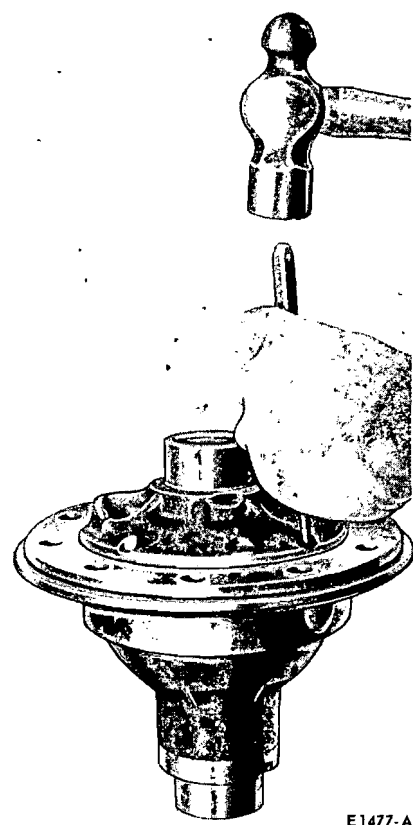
Differential Pinion Shaft Lock Pin Removal
